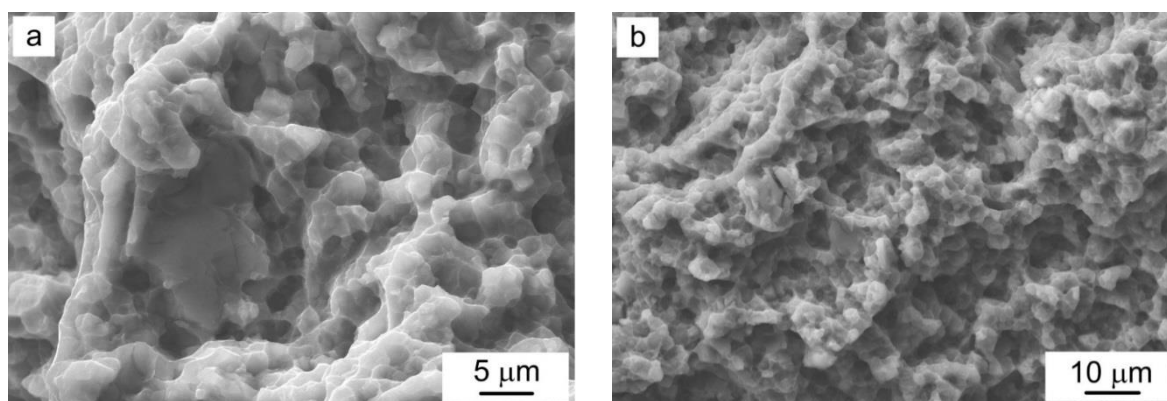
Fracture surface of specimens in ECAP state failed in tensile test a) quasi-cleavage fracture micromechanism, b) detail of ductile fracture with tiny dimples.
